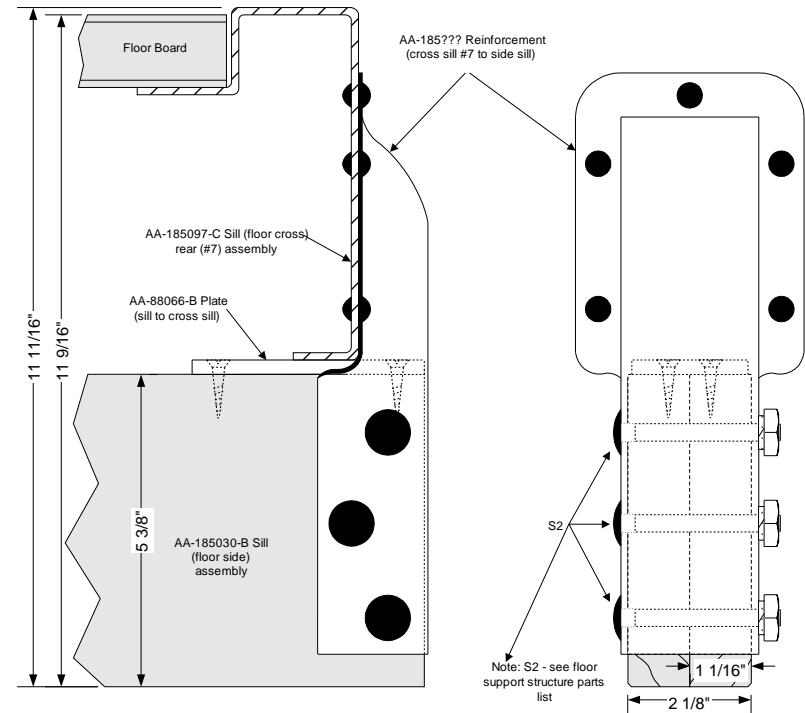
Floor, Sill, and Cross Sill #7 Details
